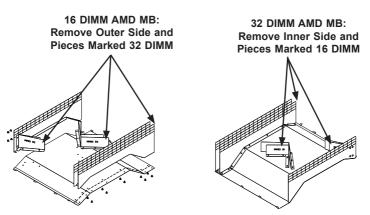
Adapting the Air Shroud for AMD Motherboards
